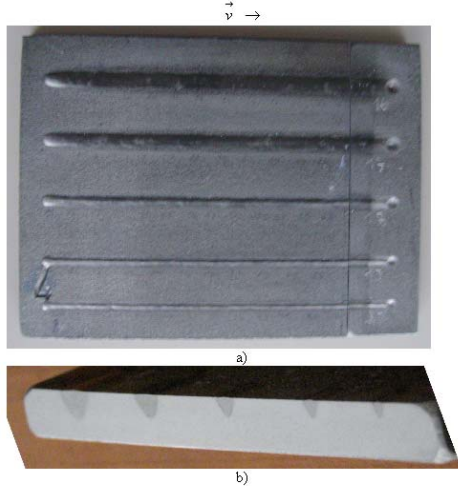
Image the welds a) plate surface b) welds cross-section
